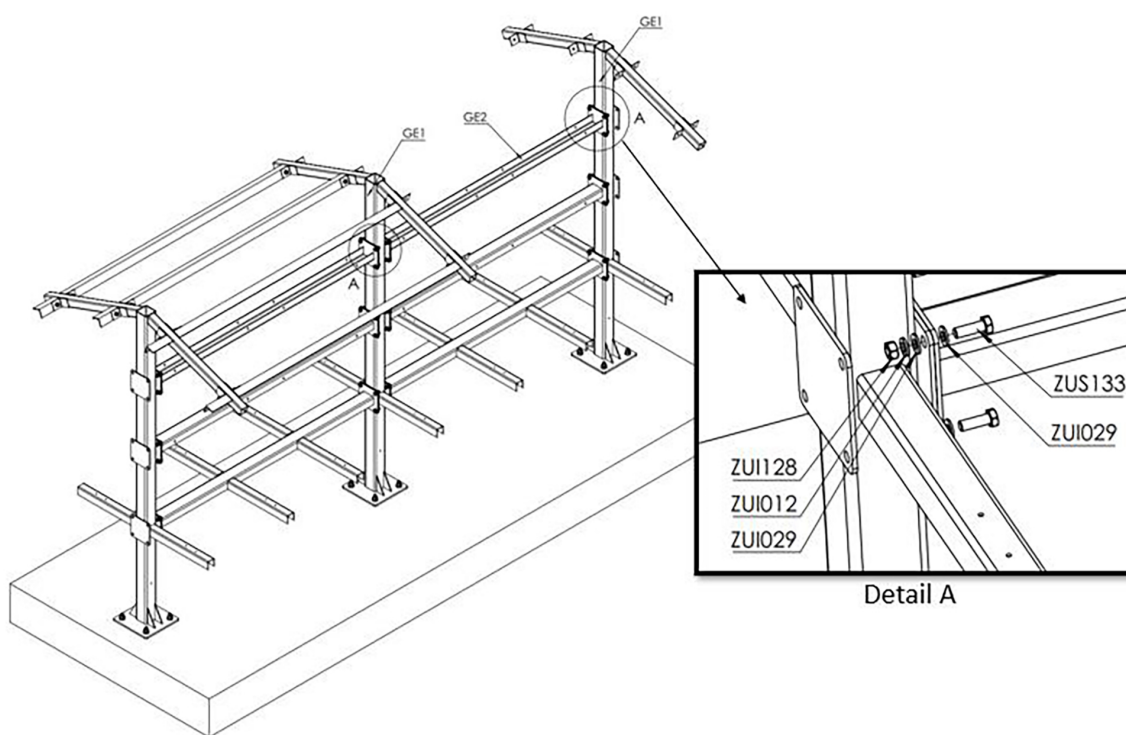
Assembly — Inverter rack — GE2-4, GE1 (detailed view)
